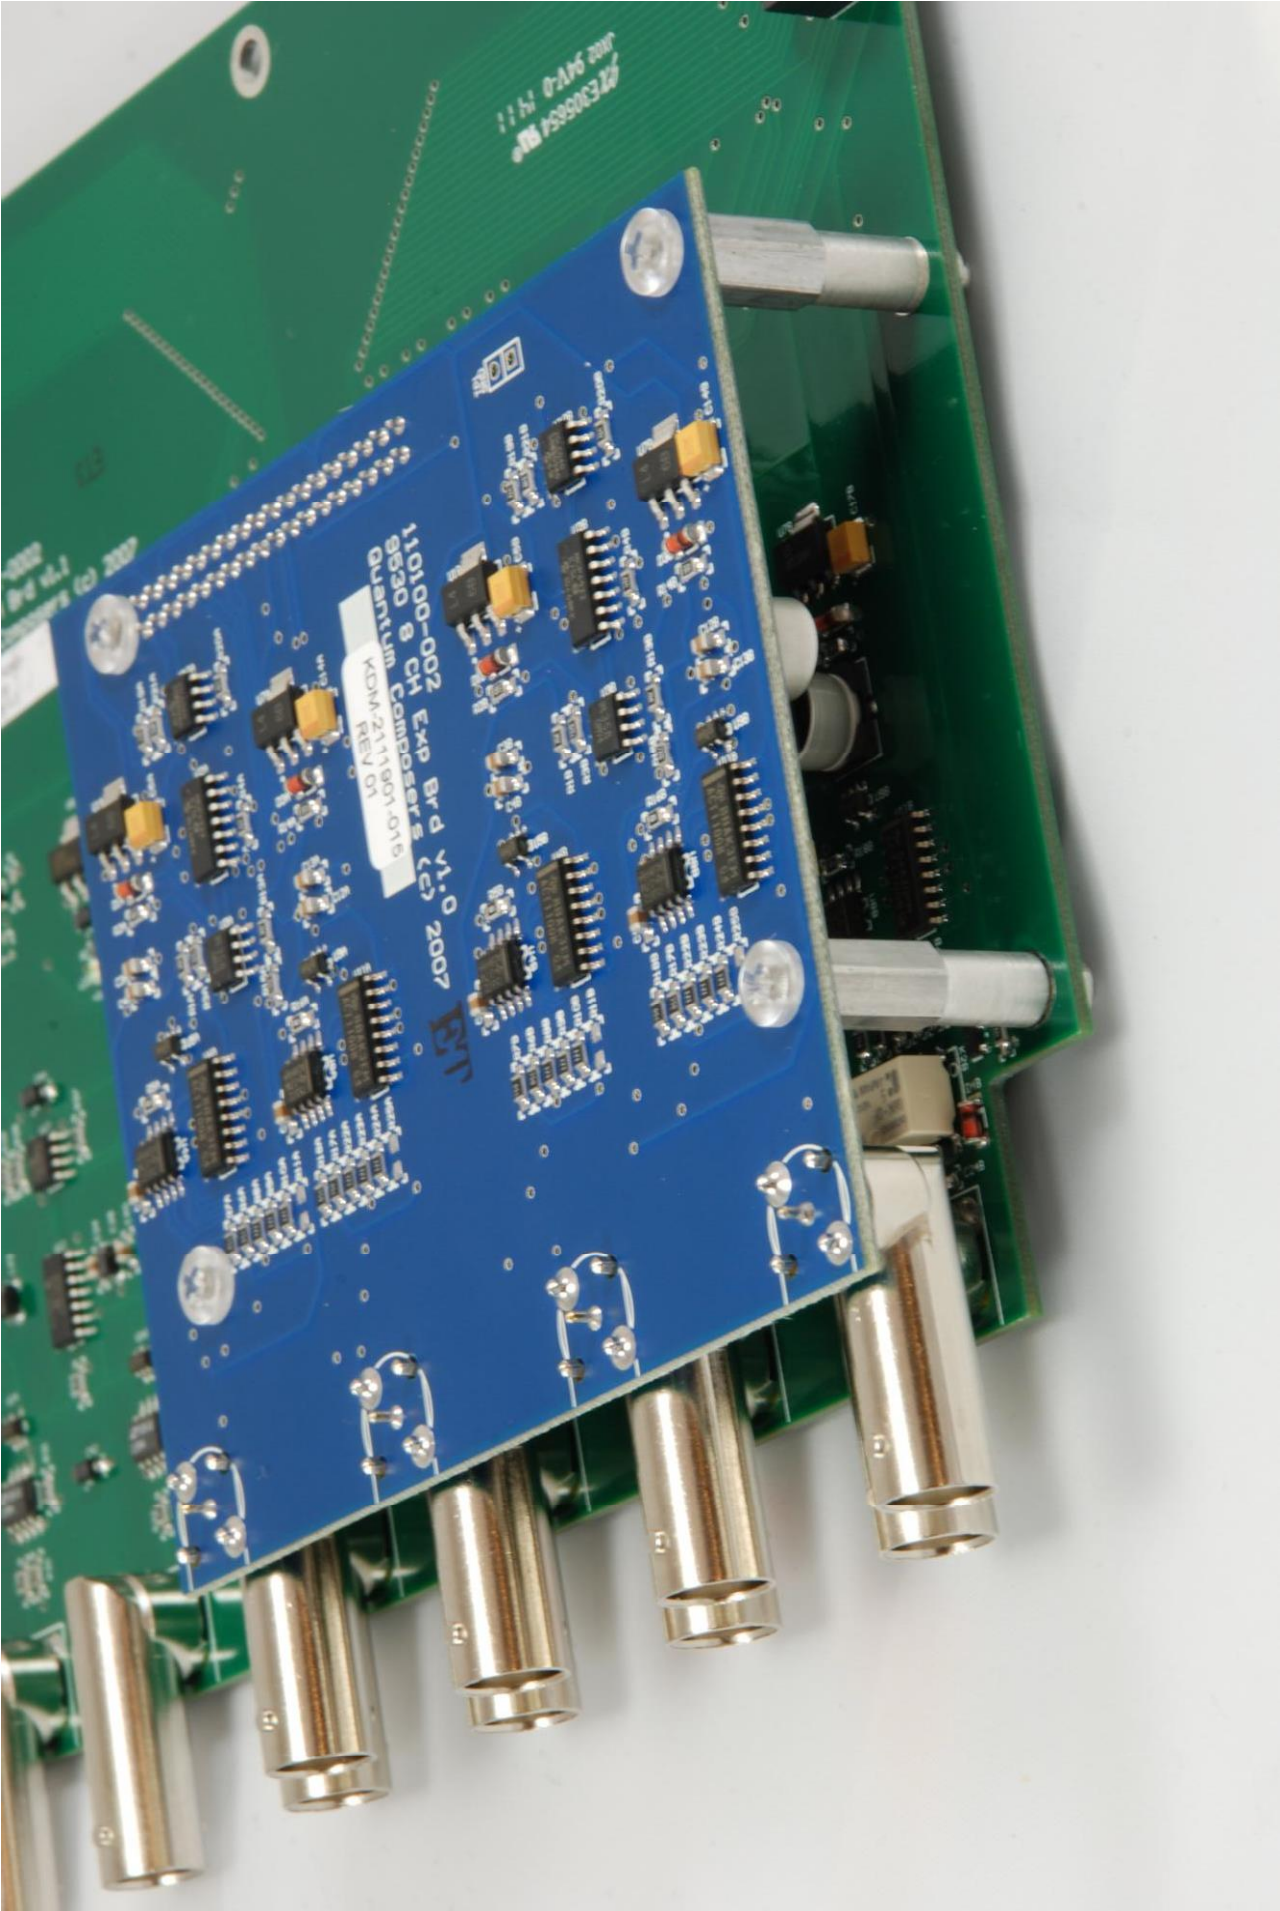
Mounting Information for the 588-OEM-250ps 4 Channel Expansion Board
